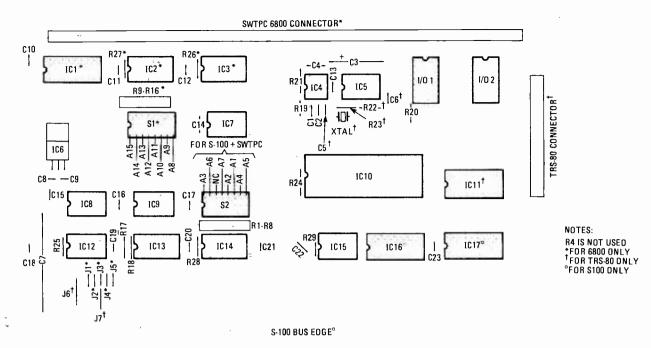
PARTS LAYOUT DIAGRAM shows where you should position the components on the printed-circuit board.
